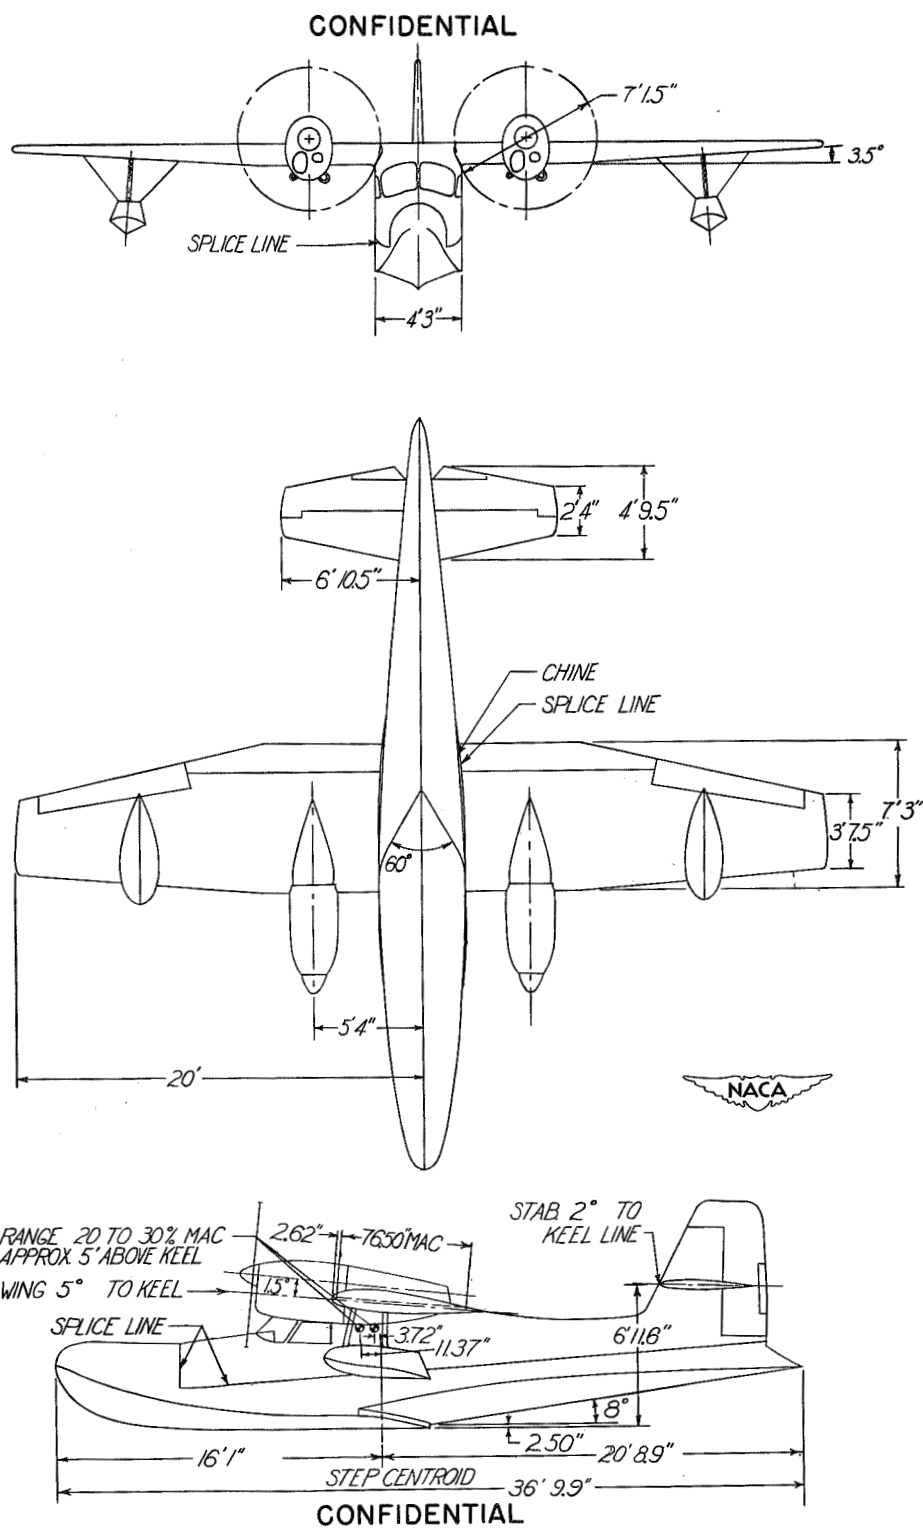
Three-view drawing of J4F-2 with XP5M-1 hull bottom.
